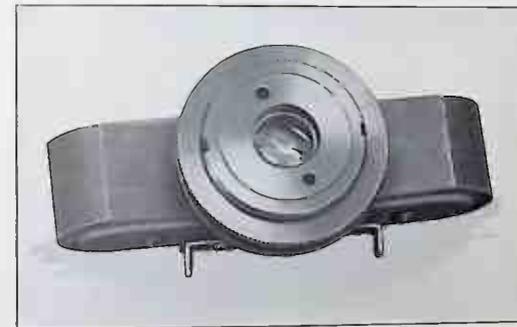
The new valve in its assembled form with the associated condenser lens.
